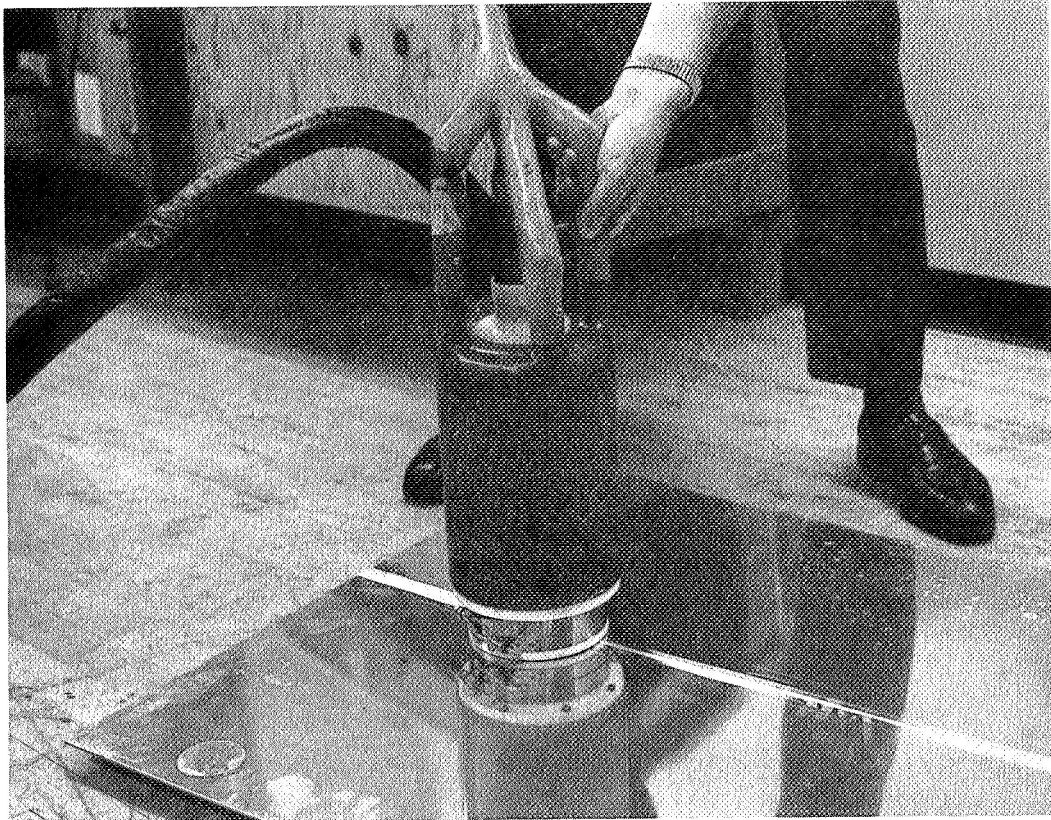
REMOVING WELD DISTORTION WITH MAGNETIC HAMMER
